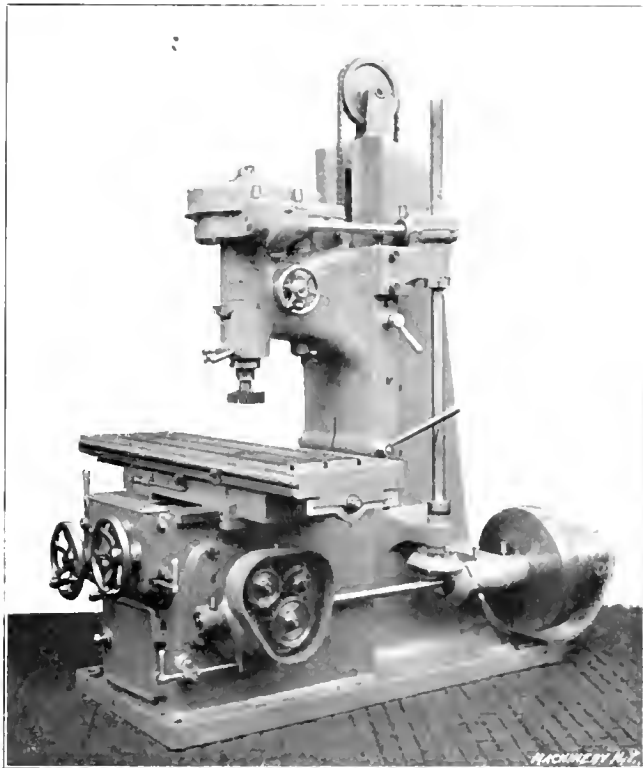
Vertical Milling Machine designed for a Wide Range of Work
